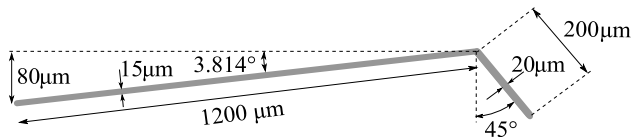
Geometry and dimensions of the nonlinear folded spring.
